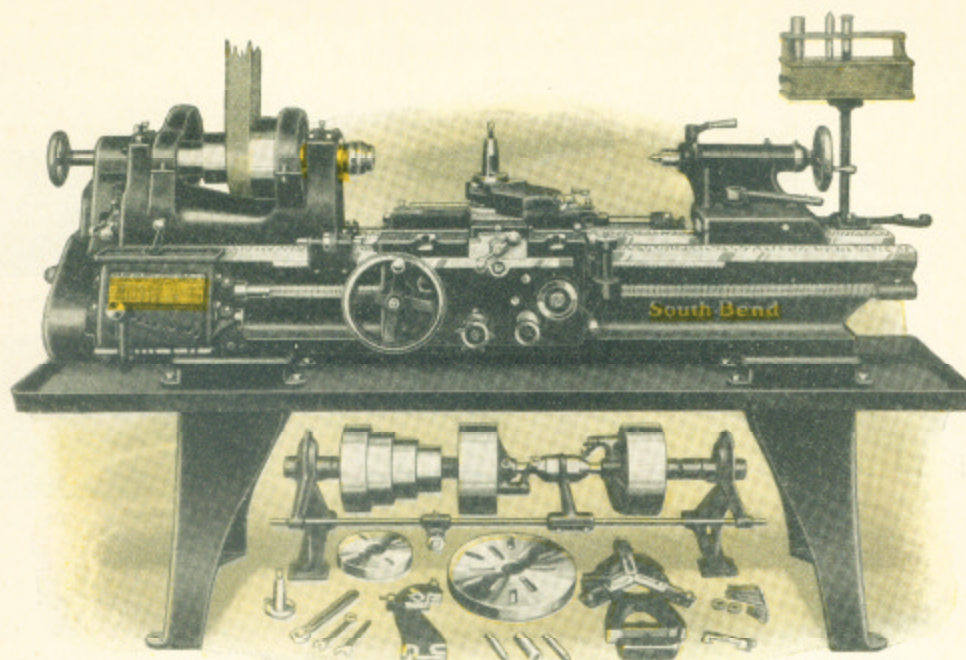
Manufacturing Small Duplicate Parts on a Quick Change Gear Bench Lathe.
